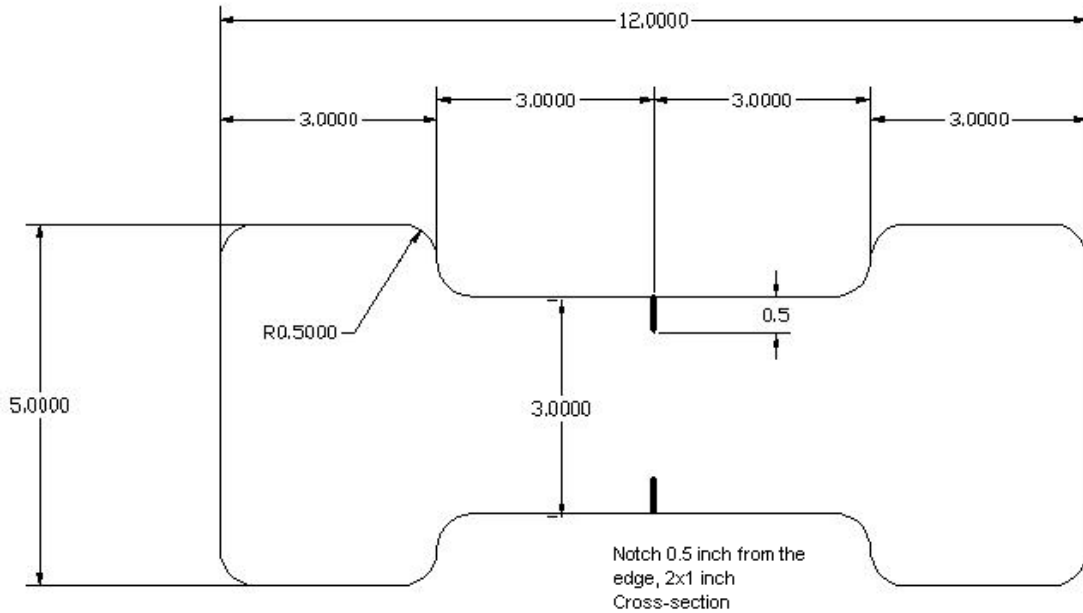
Dimensions of notched tensile prism for crack-opening displacement test (inch)
